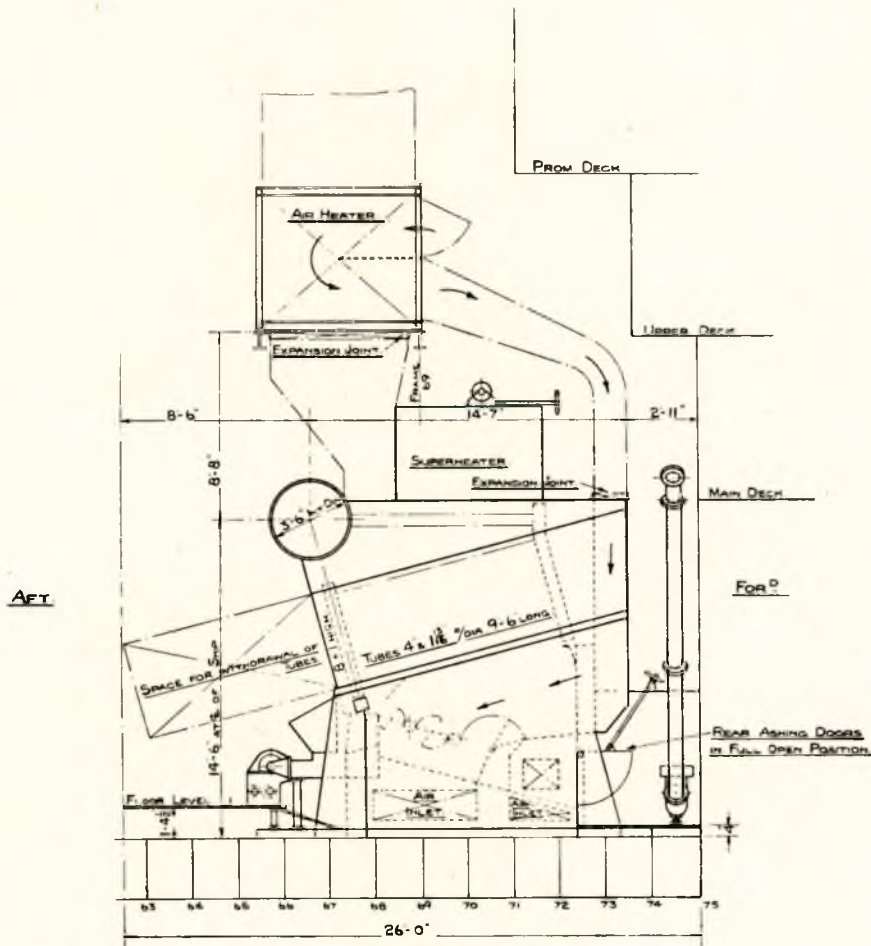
Cross section showing boiler, superheater, air heater and mechanical stoker in "Shuntien".
